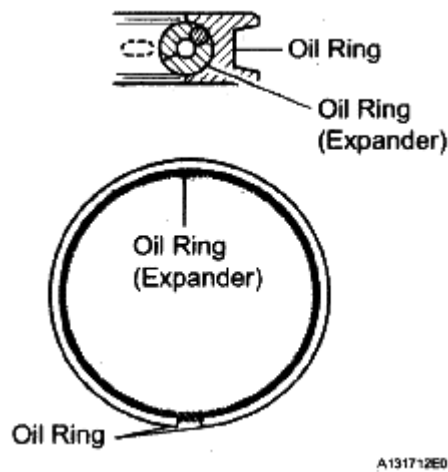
Identifying Oil Ring Expander And Oil Ring Rail
